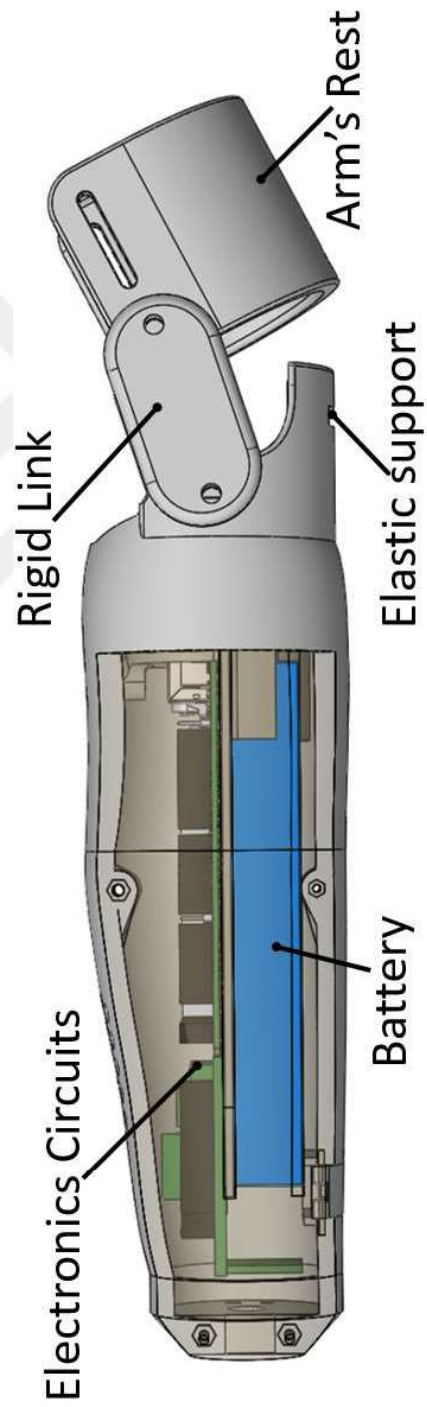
Complete assembly of socket with electronic circuits and battery.
